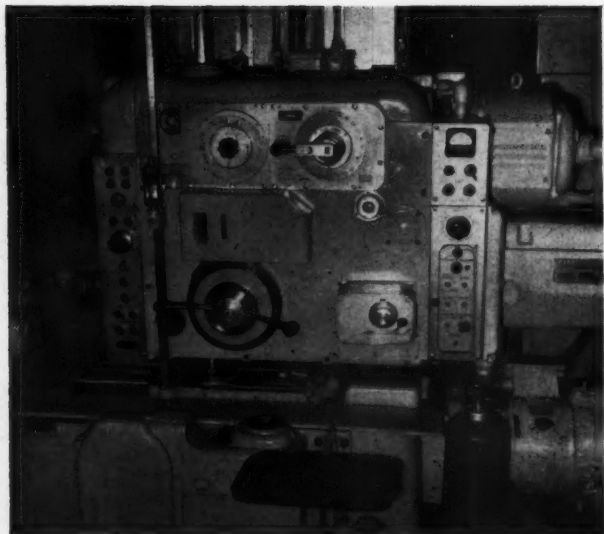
Close-up view of the spindle head on the Sverdlova machine in Fig. 1, showing the selector dials for spindle speeds and feed rates, and, at the lower right-hand side, one of the punched card control units for vertical movements of the head
